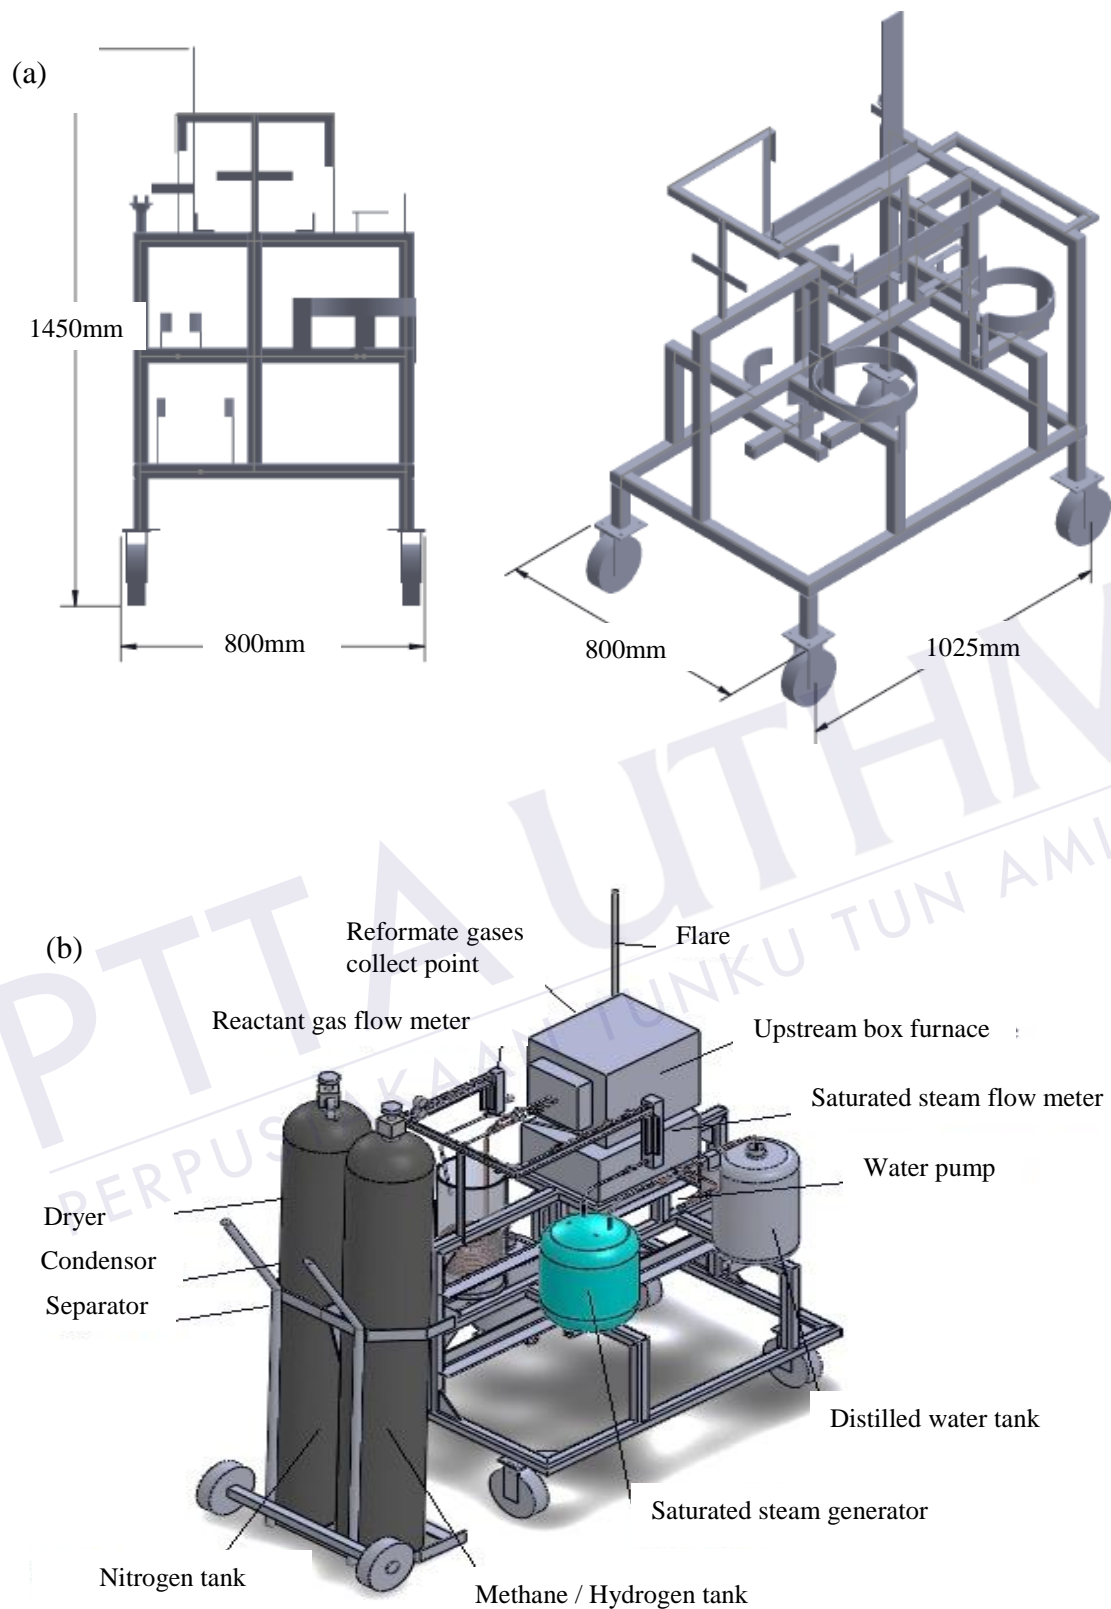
(a) Completed chasis test rig, (b) Isometric view schematic diagram of assemble SMR test rig bench, (continued)
